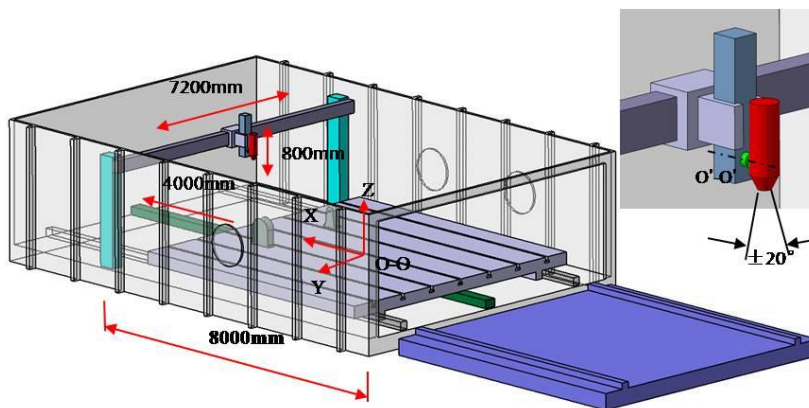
Overview of vacuum EBW designed for CC case closure welding
